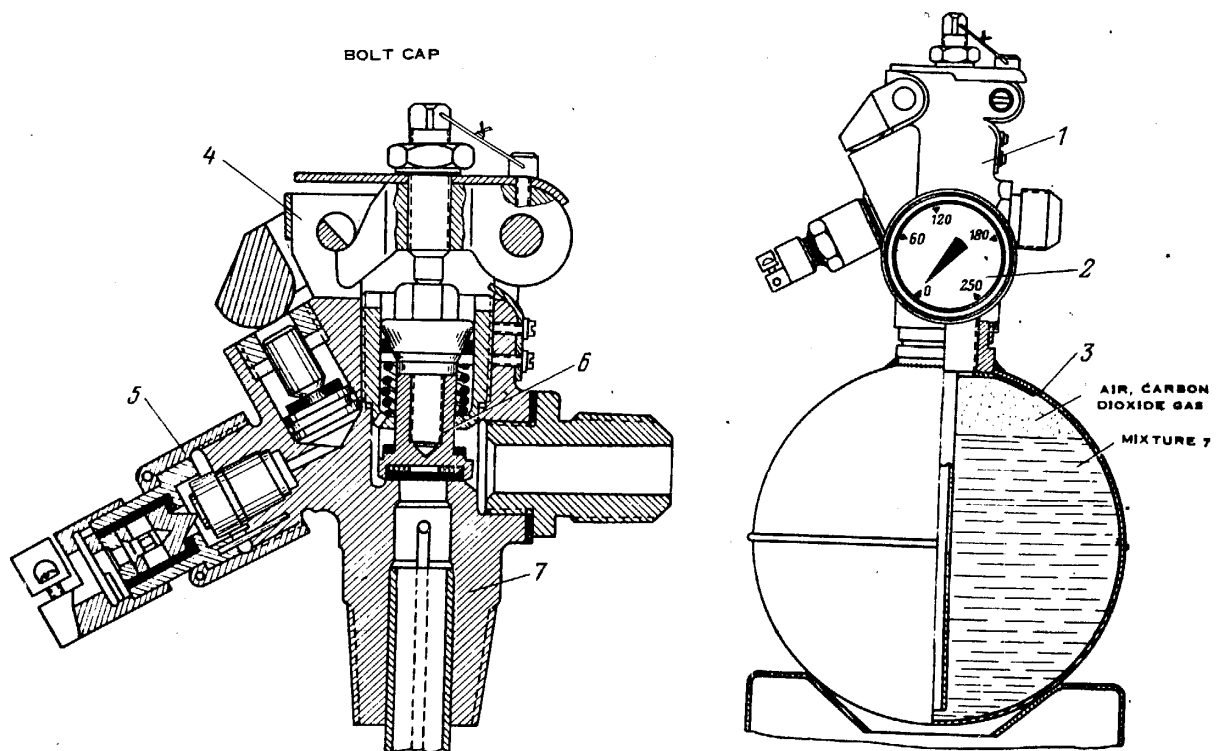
FIRE-EXTINGUISHING BOTTLE WITH BOLT CAP
